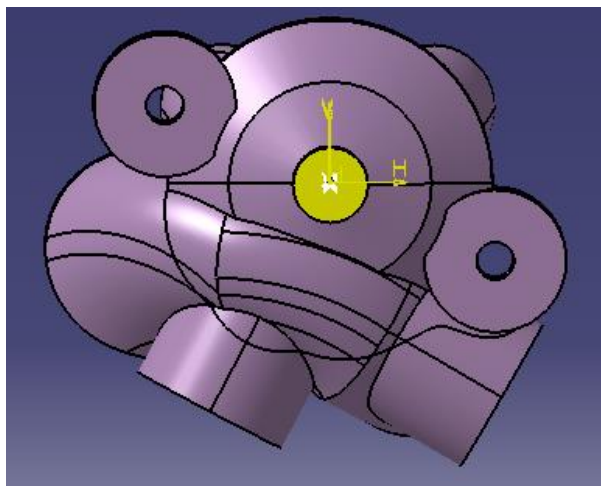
, CAD drawing of Air drill with top (Grindley, 2014)
